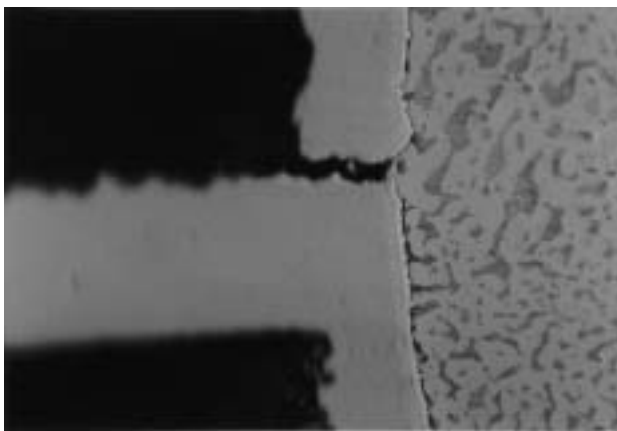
Inner layer cracking in multi-layered PCB (200×)
